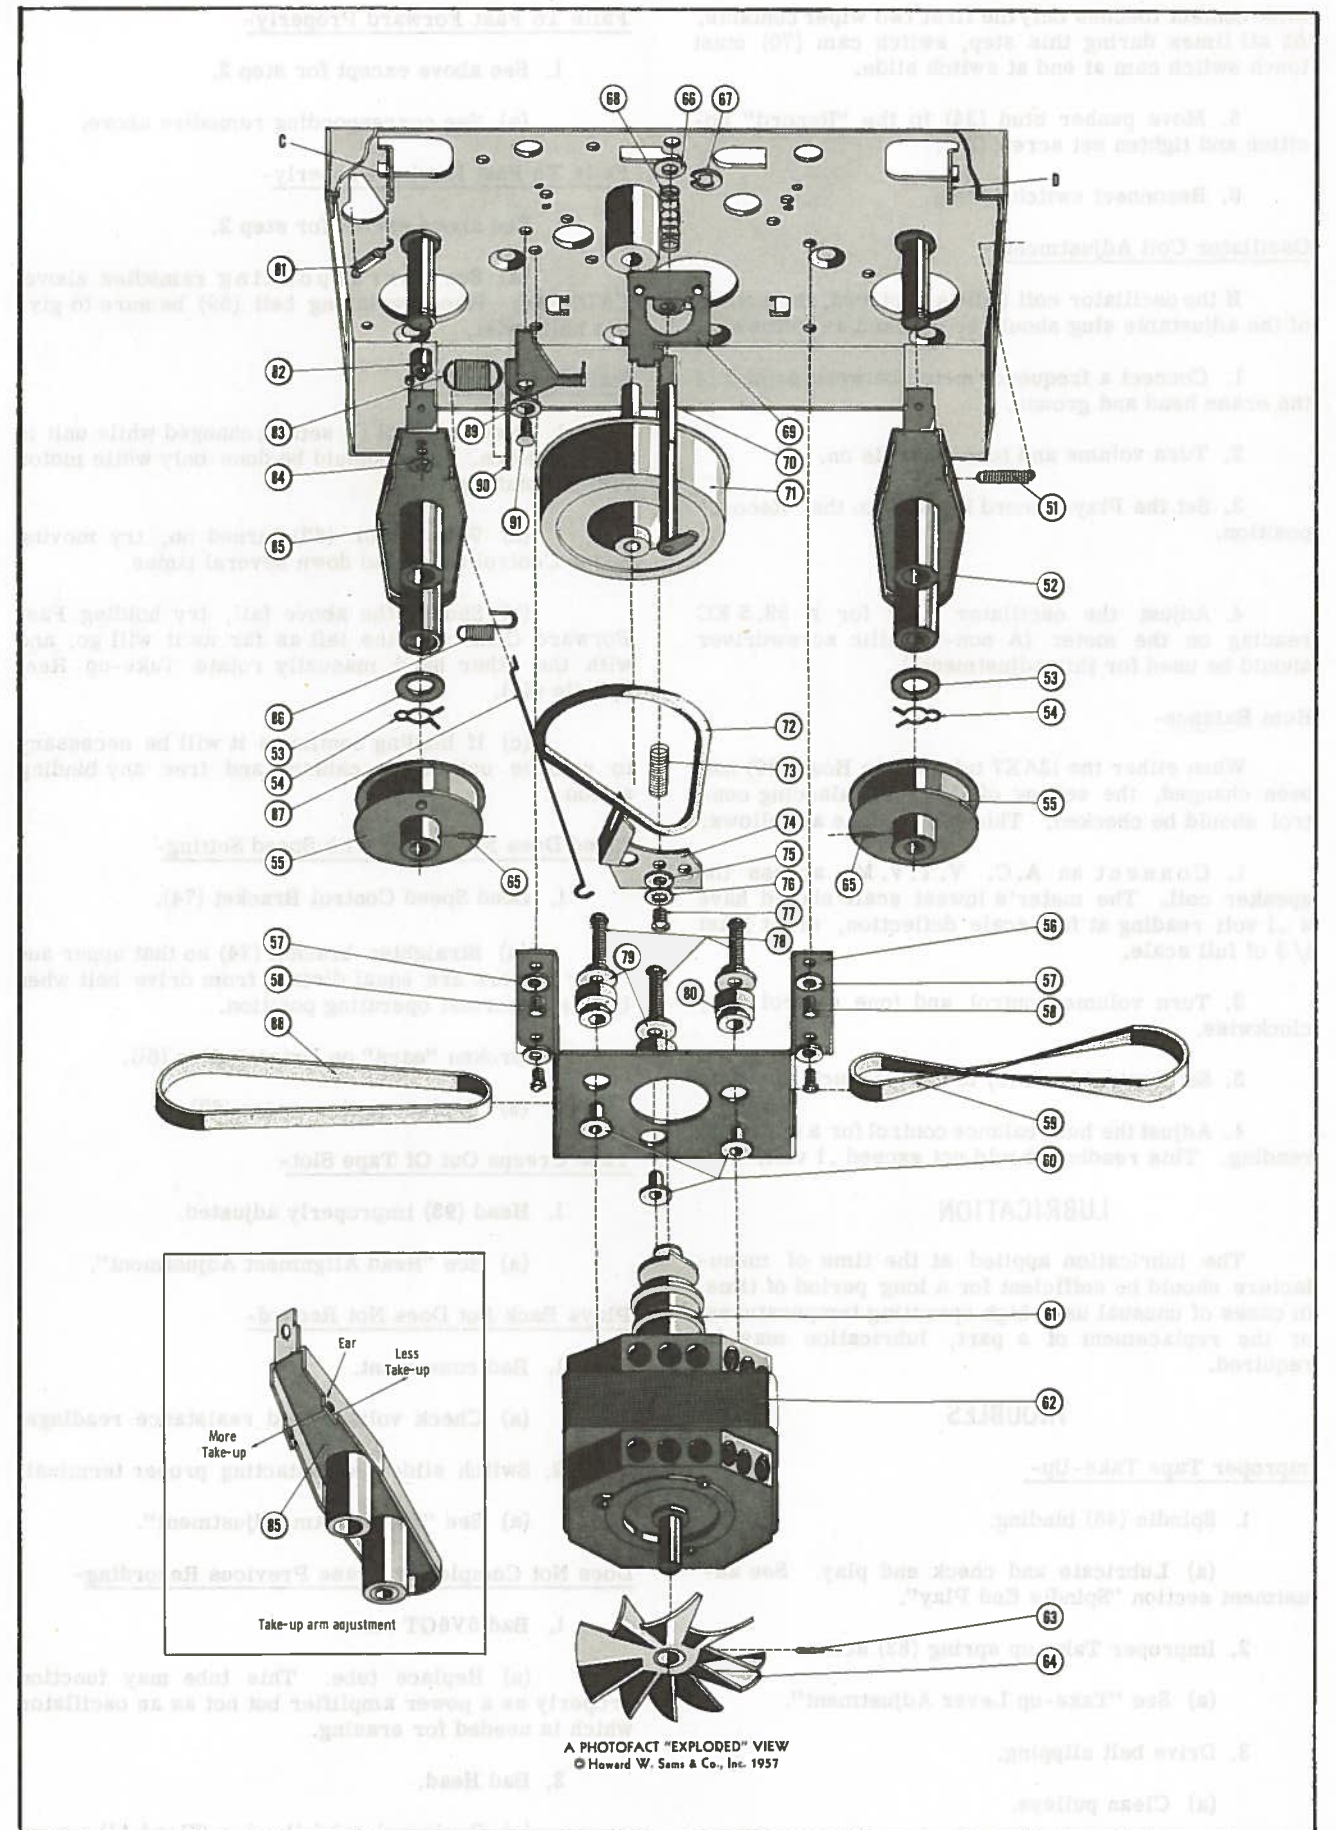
B. EXPLODED VIEW OF PARTS BELOW BASEPLATE.
